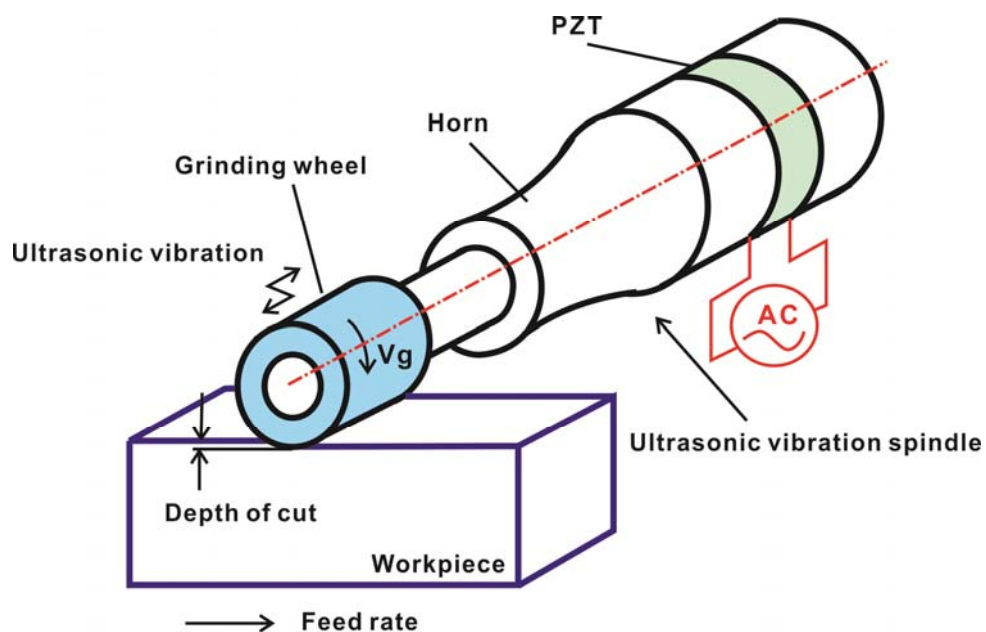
A grinding wheel is screwed on the end face of a rotary ultrasonic
